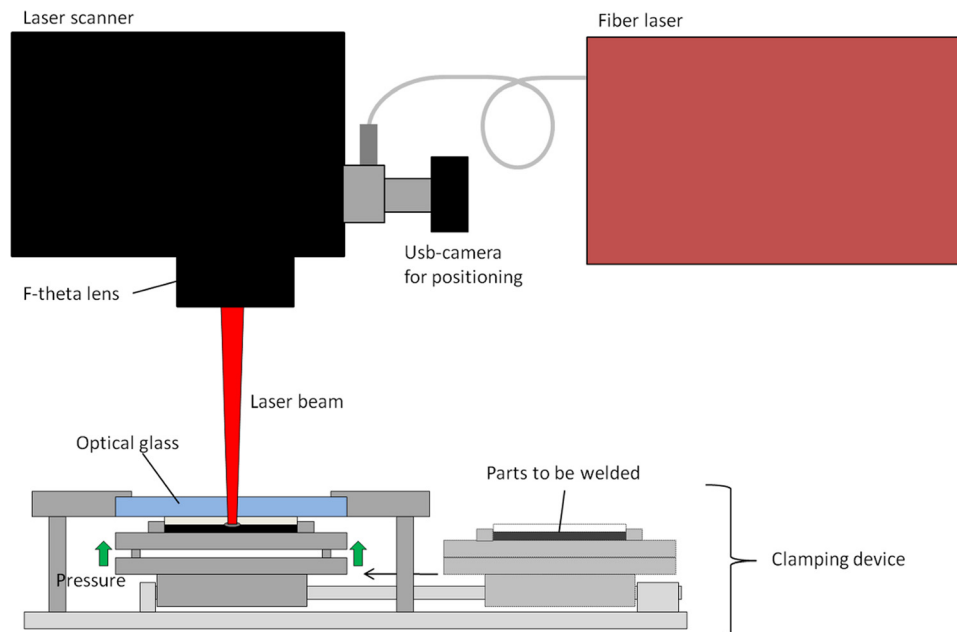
A schematic drawing of the laser welding setup.
